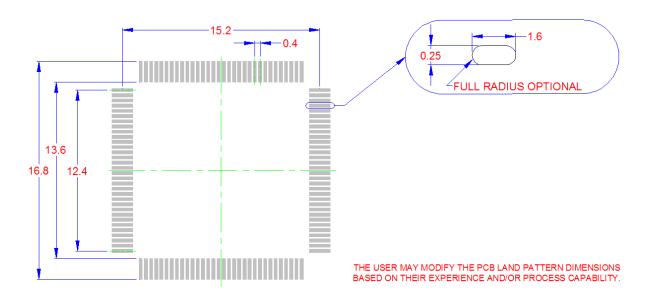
128-VTQFP Recommended PCB Land Pattern
